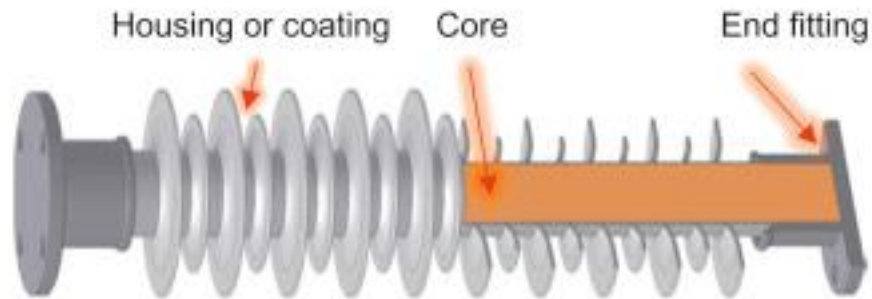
Different components of composite insulators containing of composite core, polymeric housing, and metallic connectors
